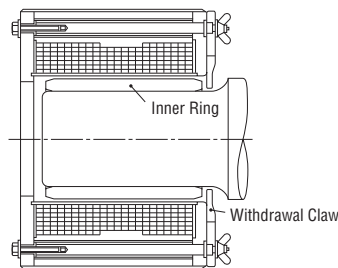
Removal of Inner Ring Using Induction Heater
